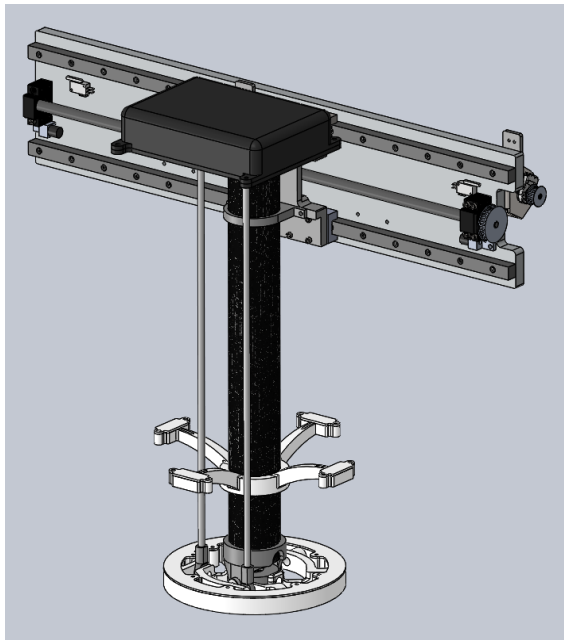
Sensor Arm Mounted to Sliding Mechanism
